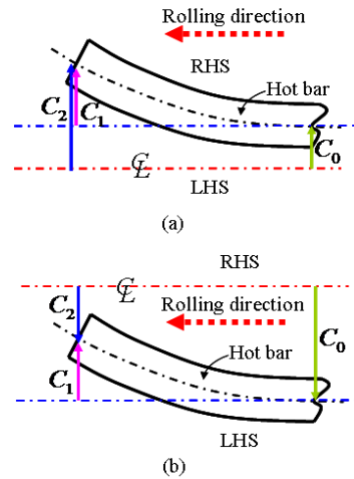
Positions of the front end of hot bar when (a) C_2 becomes the camber and (b) C_0 becomes the camber (RHS: Right Hand Side, LHS: Left Hand Side)
